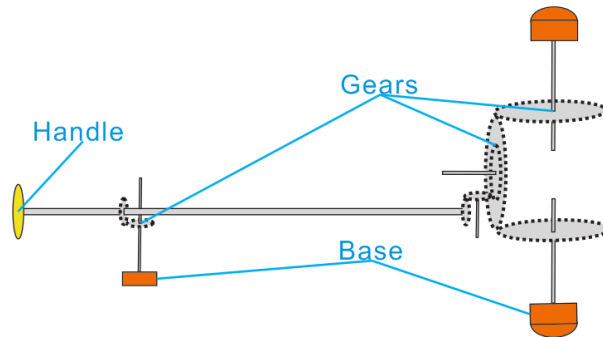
Design 2 for Centering from PDR was a system of gears that could be cranked out to center the cradle in the MRI.
